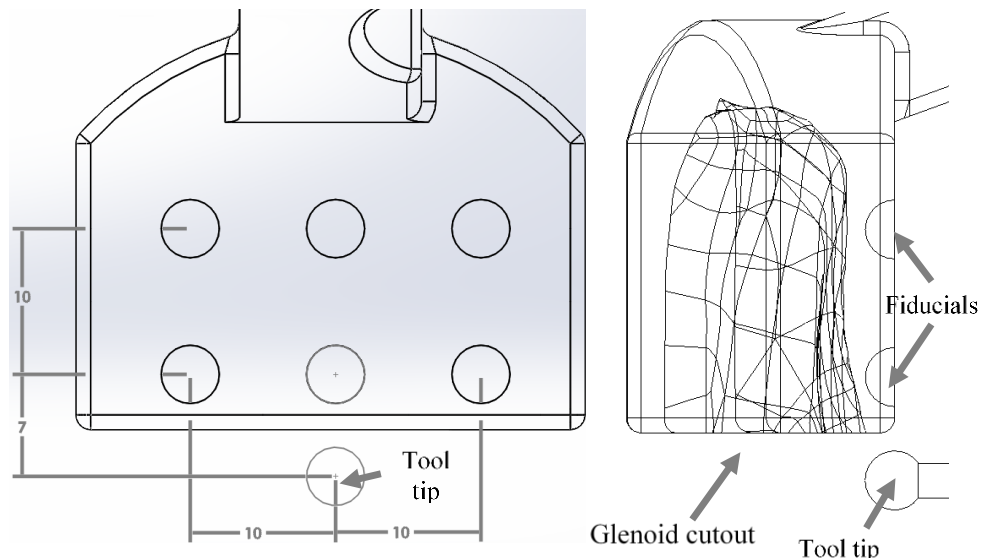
Glenoid implant fiducials relative to tool tip front view (left) and side view (right), dimensions in mm
